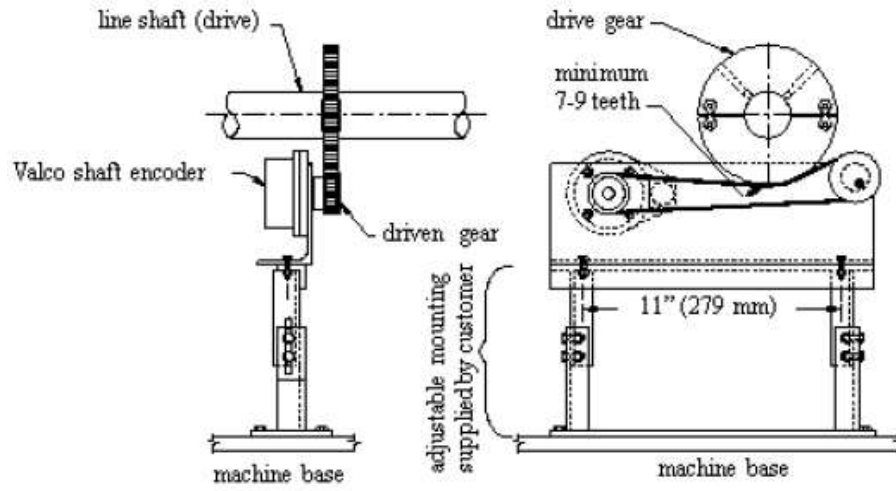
Typical Installation of a Gear-Driven Encoder
